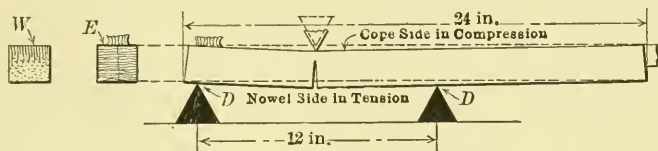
END AND SIDE VIEWS OF A TEST BAR MADE IN MOLD, FIG. 1
